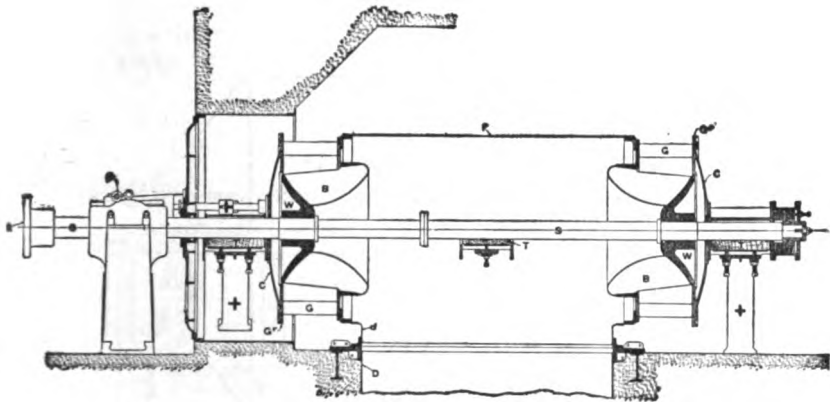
Section Double Wheel with Common Draft Tube. (Dayton, Globe Iron Works Co.)
